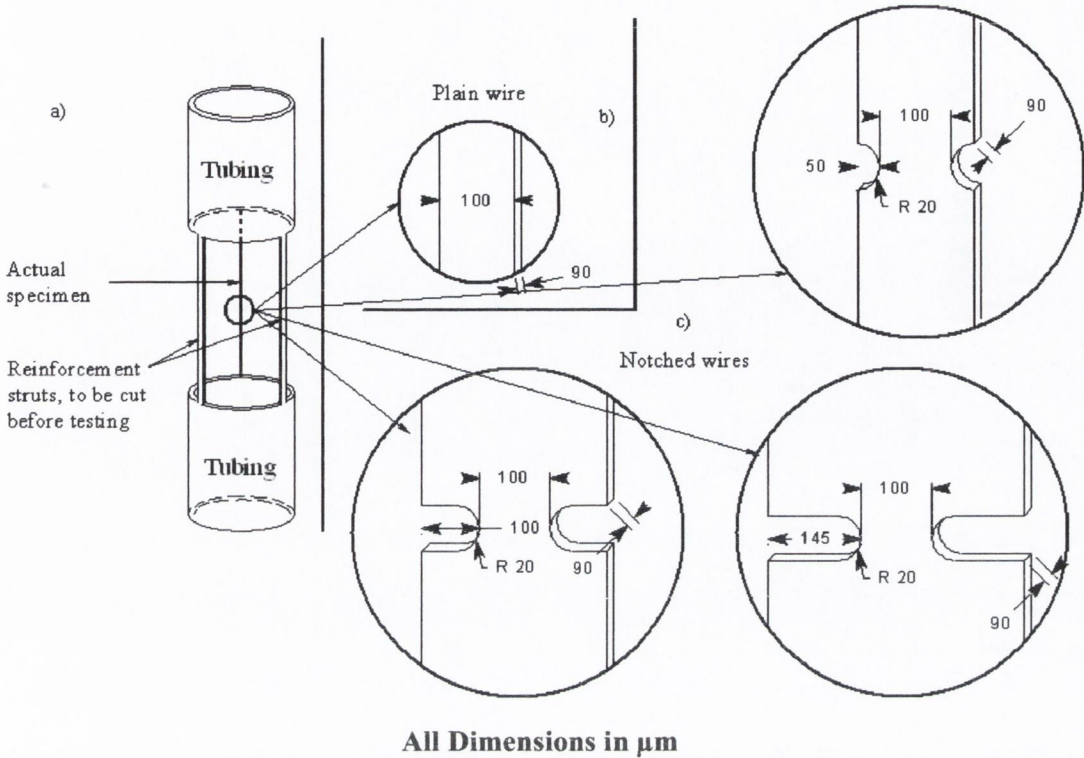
Wire specimen within the tubing containing reinforcement struts
